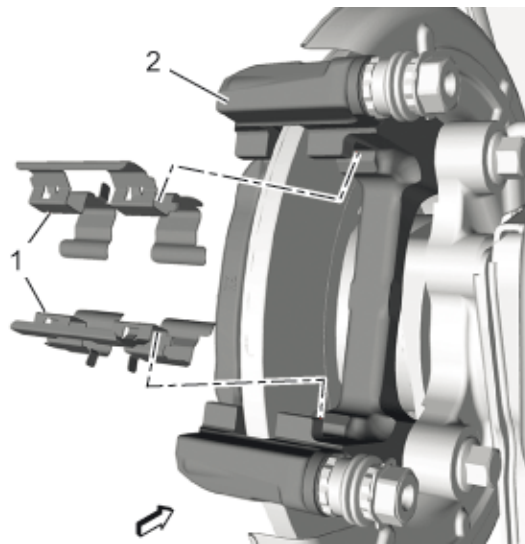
Brake Caliper Bracket And Brake Pad Springs
